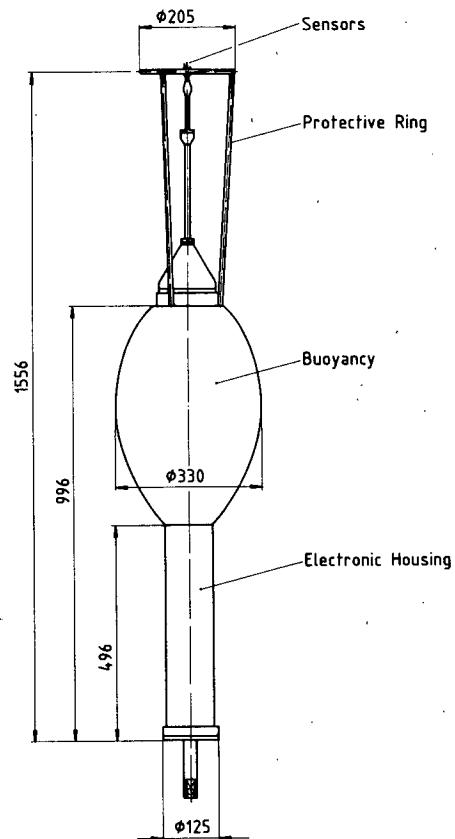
Schematic drawing of STEP. The electronic housing is made of stainless steel. The weight is 250 N and the net buoyancy force is 130 N. The dimensions are in mm.
